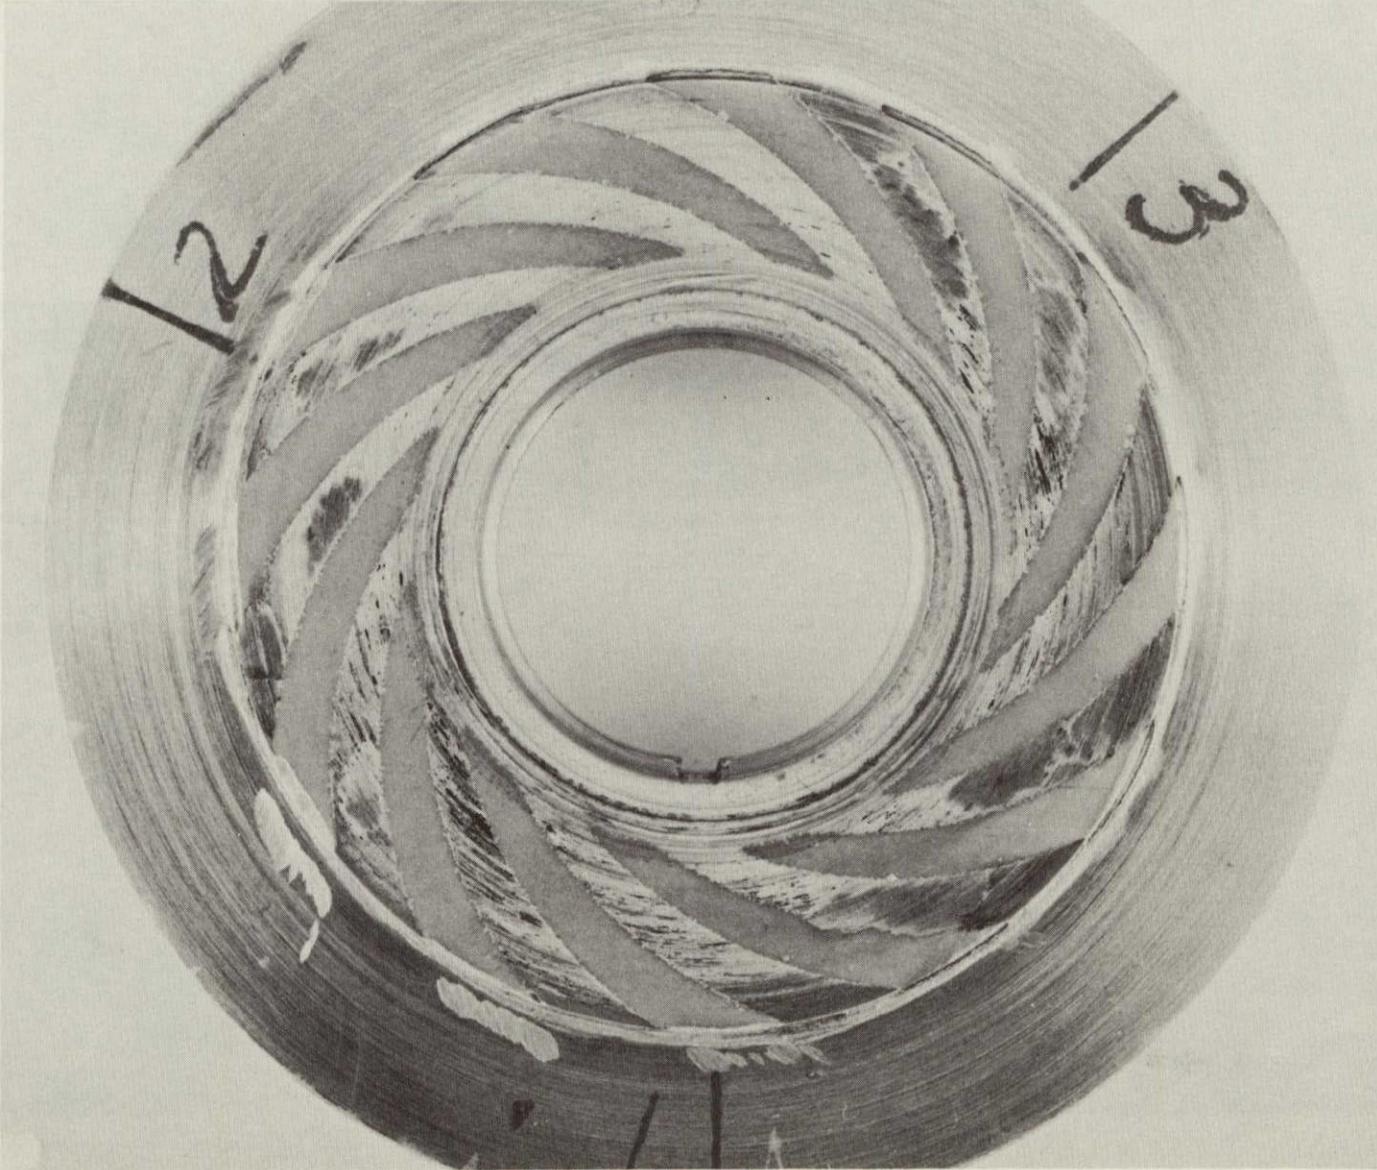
Spiral Groove LOX Seal Mating Ring (C28-0812-10, S/N 03, Build 14, Posttest 749)
